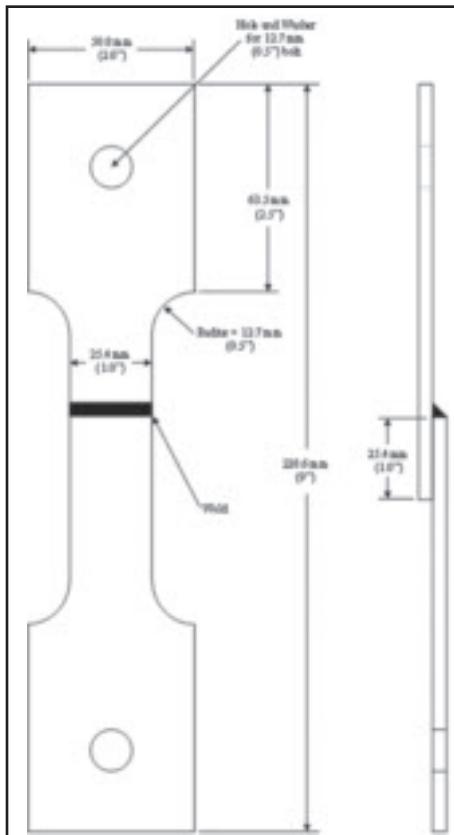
Reduced cross-sectional geometry of lap joint tensile specimens.
